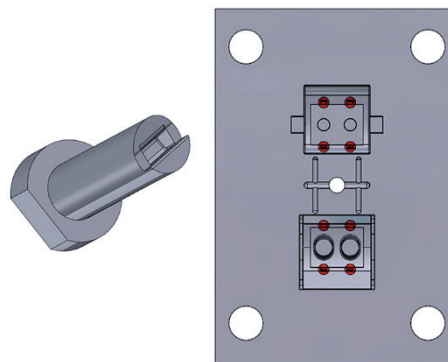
Air venting insert CAD model and locations at mould parting plane [6]
